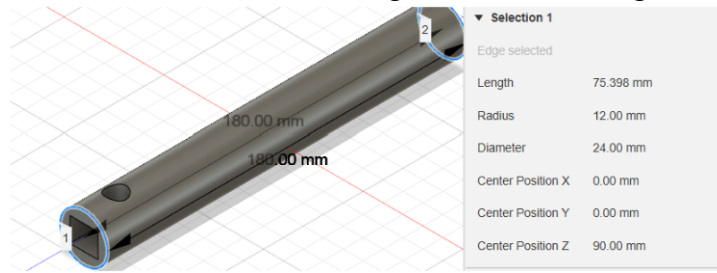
The Structure of Connecting the Motor to the Rod Fixture
